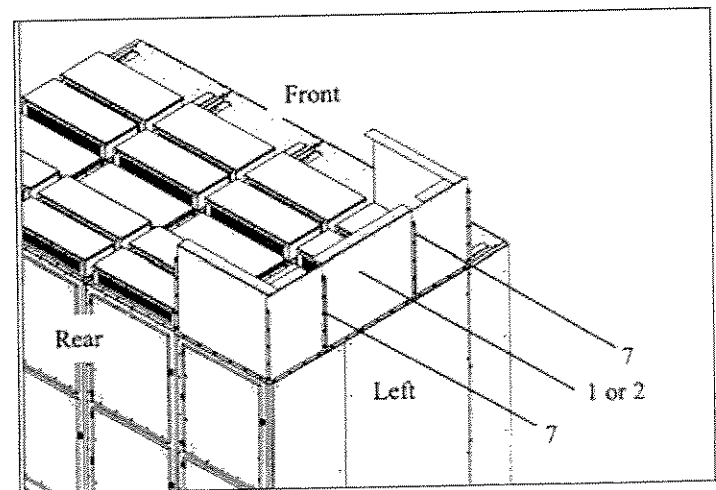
Detail of the Left Arc Duct Plenum Wall.
